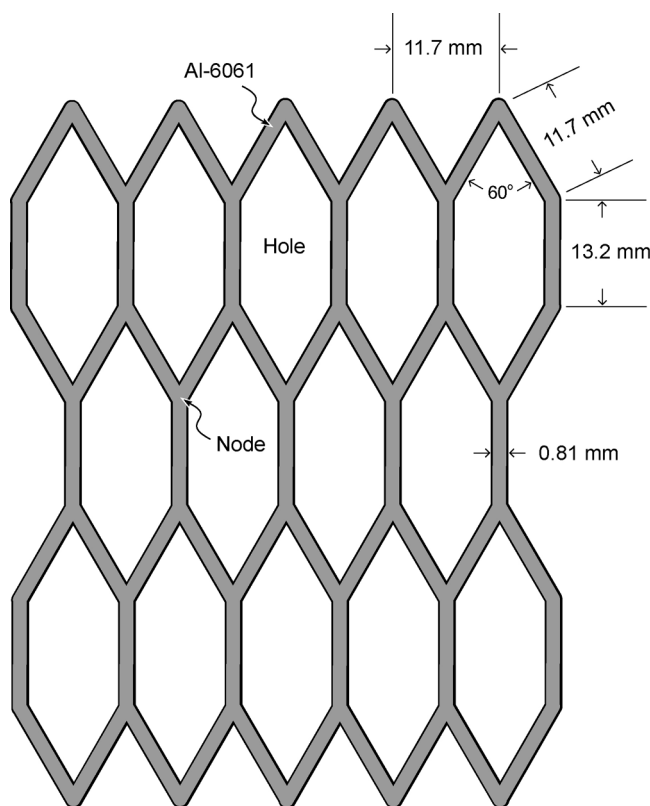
Perforated sheet design for tetrahedral cores made from Al-6061. The particular dimensions depend upon base material type, sheet thickness, and bending apparatus. This sheet was 0.032-in. (0.81-mm) thick.
